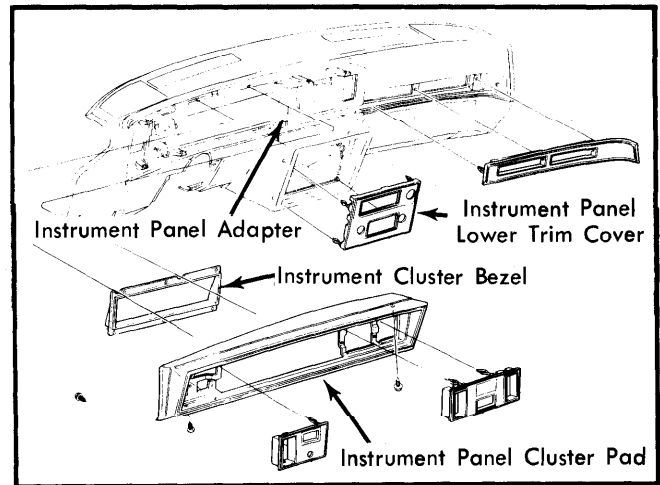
Instrument Panel Trim Removal (Cutlass)
